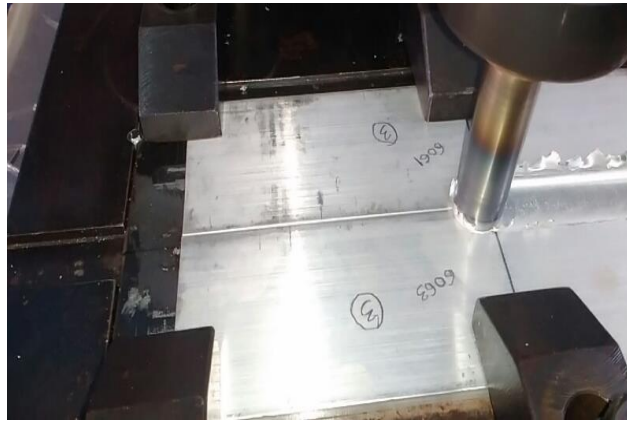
Fsw Tool Is Moving On Fsw Sample Given By CNC Commands
